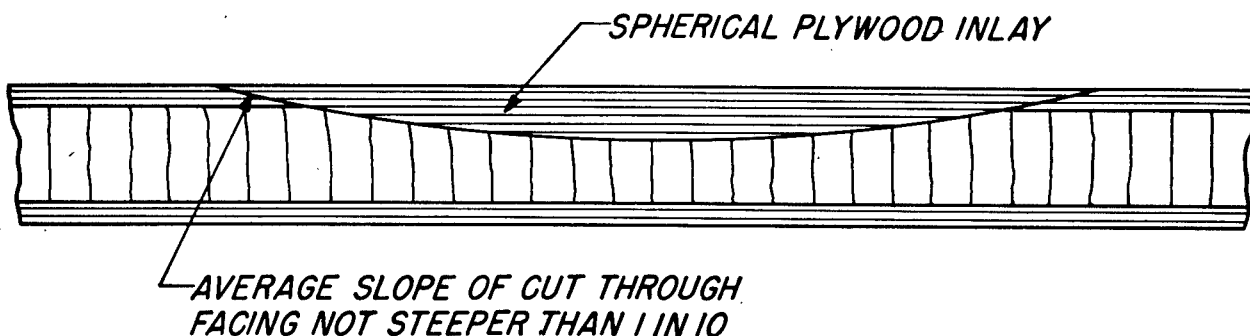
Cross section of a plywood inlay installed in a plywood-faced sandwich.
